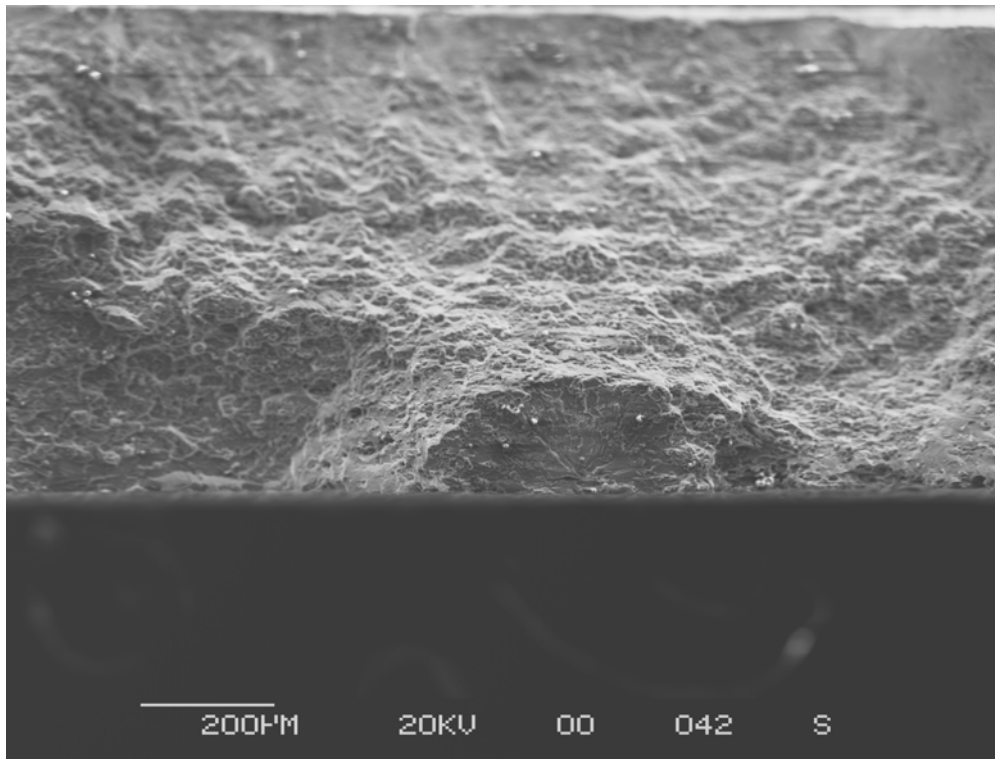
Third Fatigue Crack on Specimen 5878 to the Right of the Primary Crack in Figure B-39.
